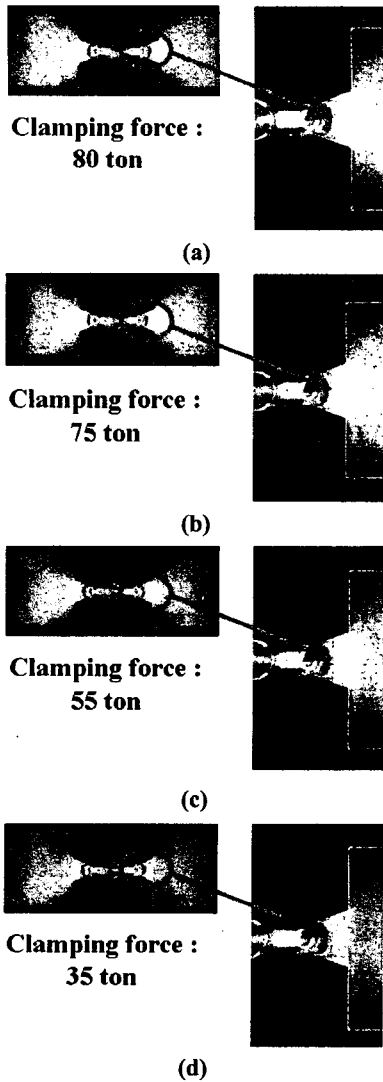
General injection molding and injection-compression mode with clamping force (a) 80 ton (general injection molding), (b) 75 ton, (c) 55 ton, and (d) 35 ton.
